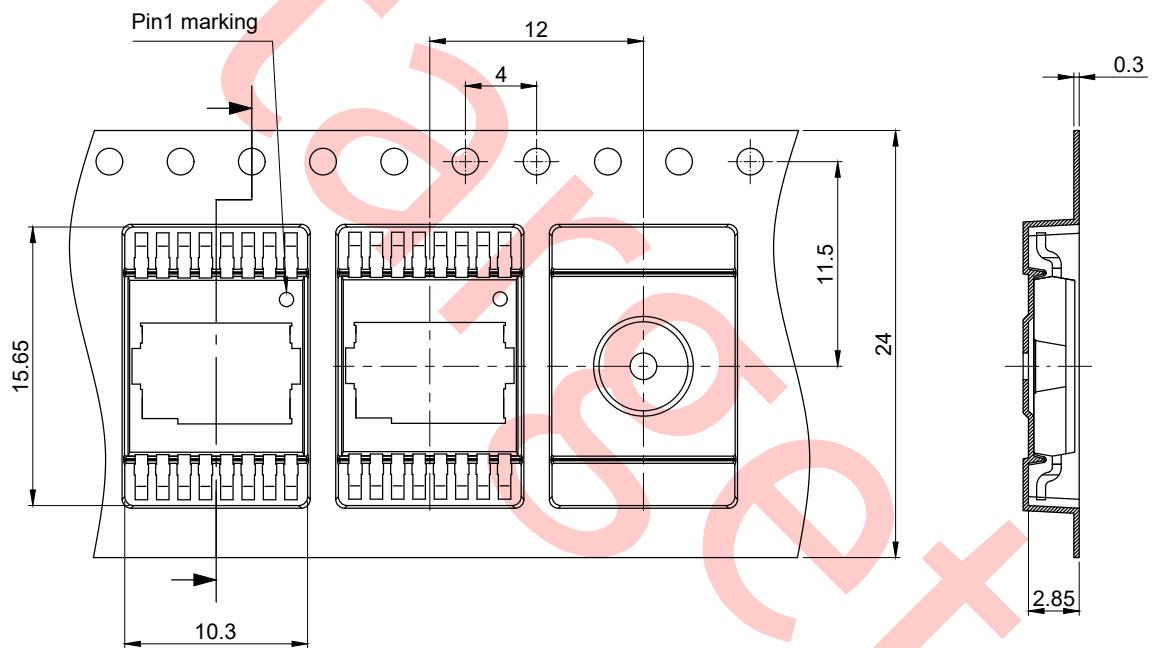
Outline PG-HDSOP-16, dimensions in mm
